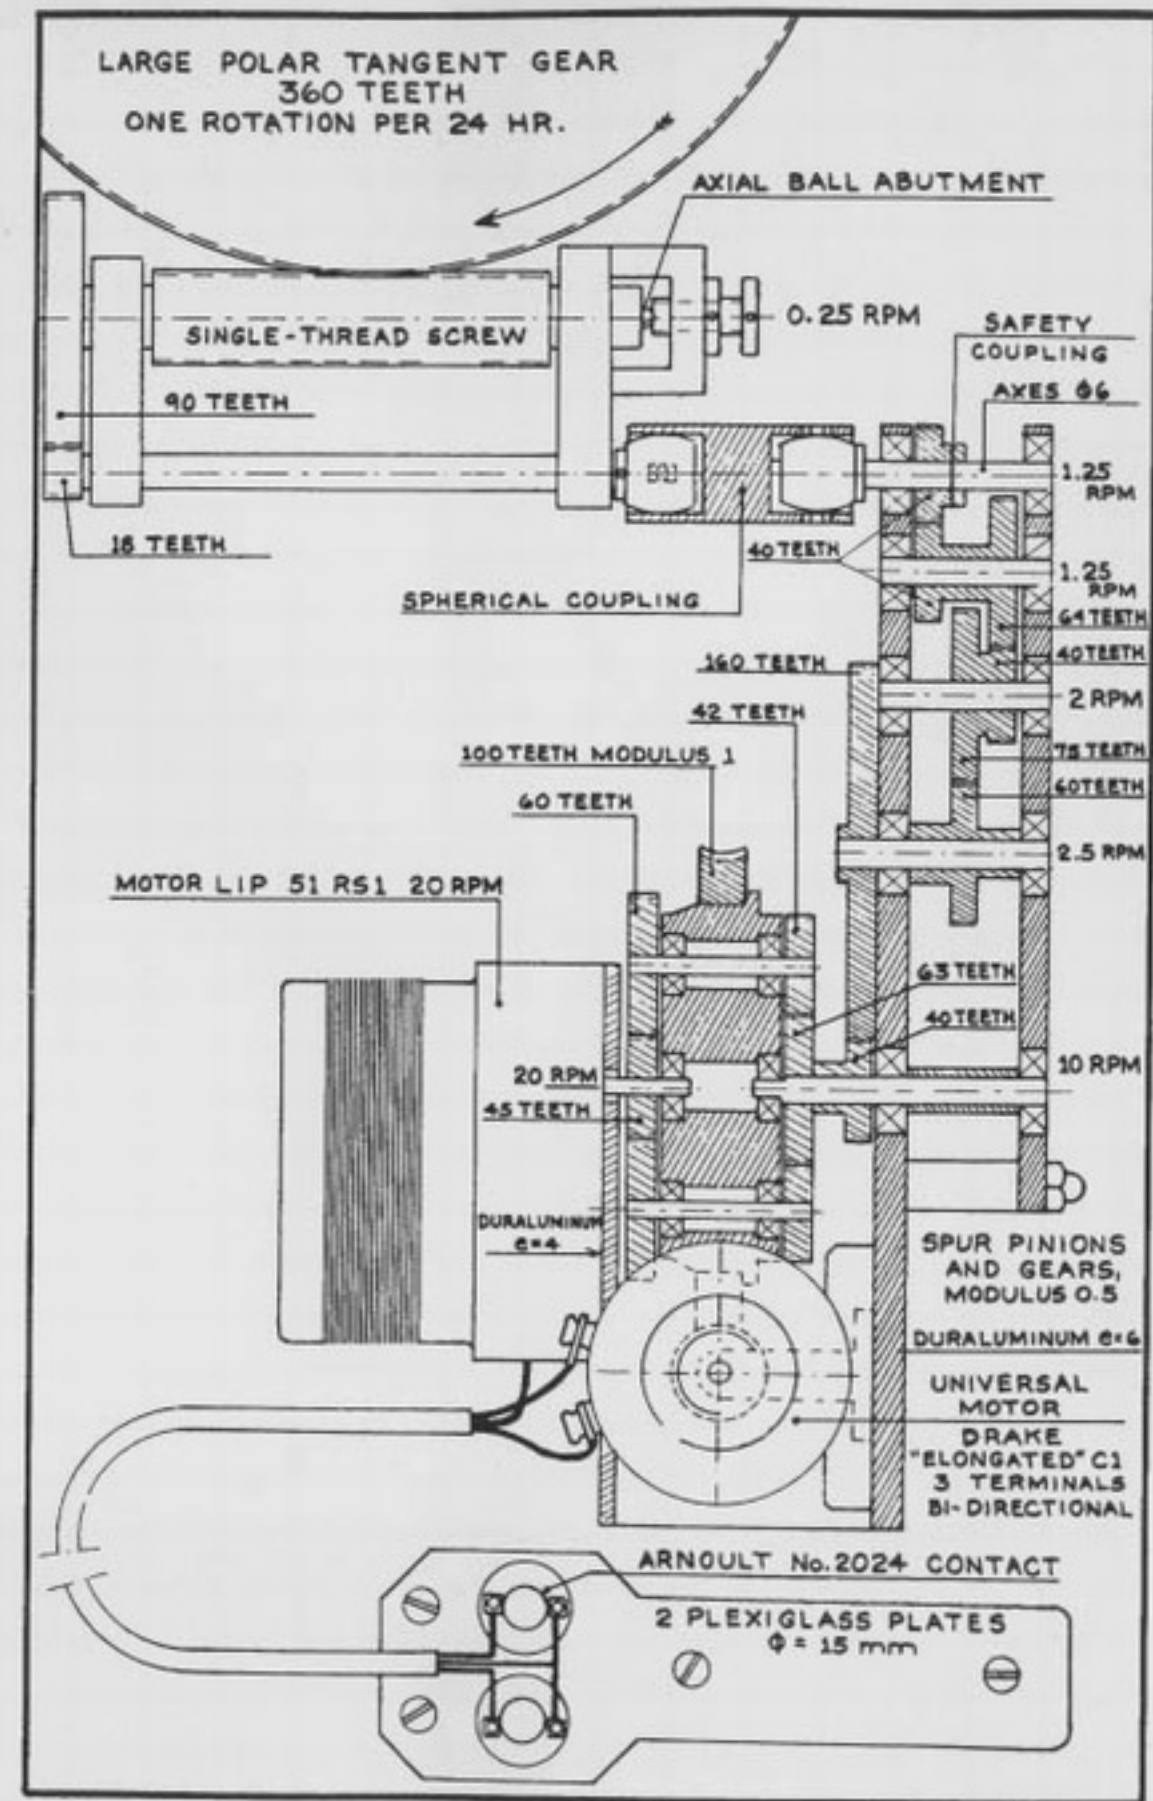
Schematic assembly of motor and reducing gears on the 153mm equatorial of the Société Astronomique de France.
